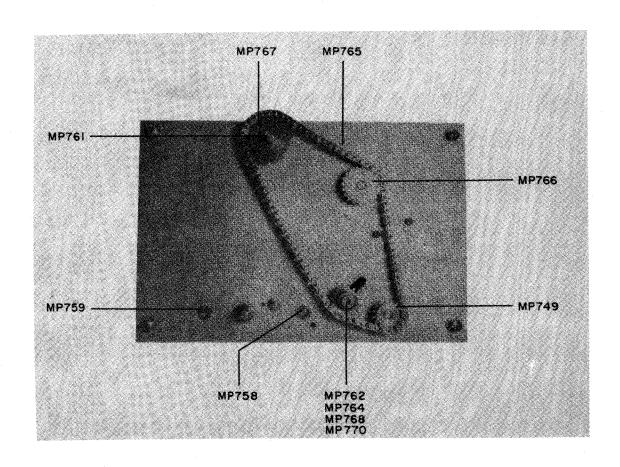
A. Electrical Frequency Control C-2764/WRT-2, Location of Parts on Back Plate of Gear Box, Sets, Serial Nos. Al thru A178, D1 thru D327.
